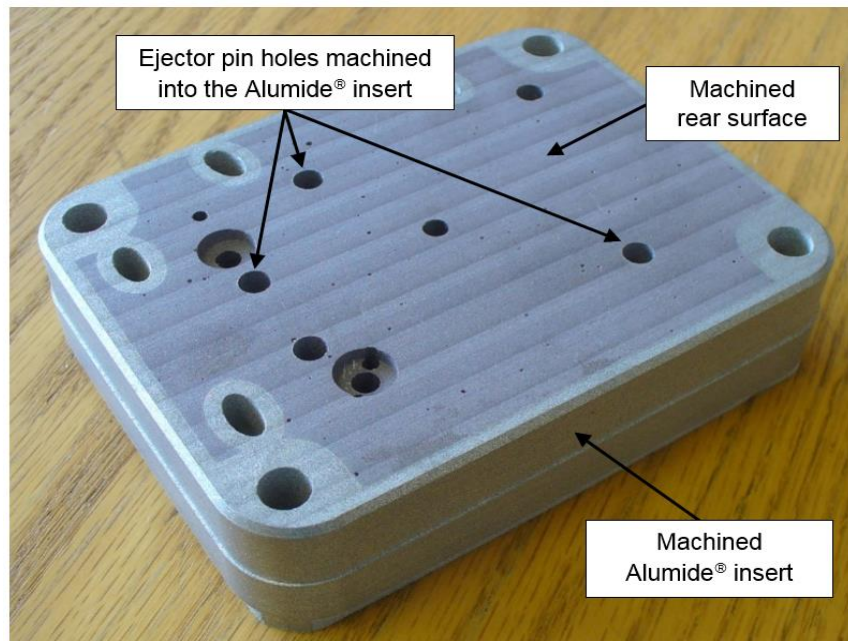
Alumide[®] insert with machined rear and outer surfaces as well as drilled and reamed ejector pin holes.
